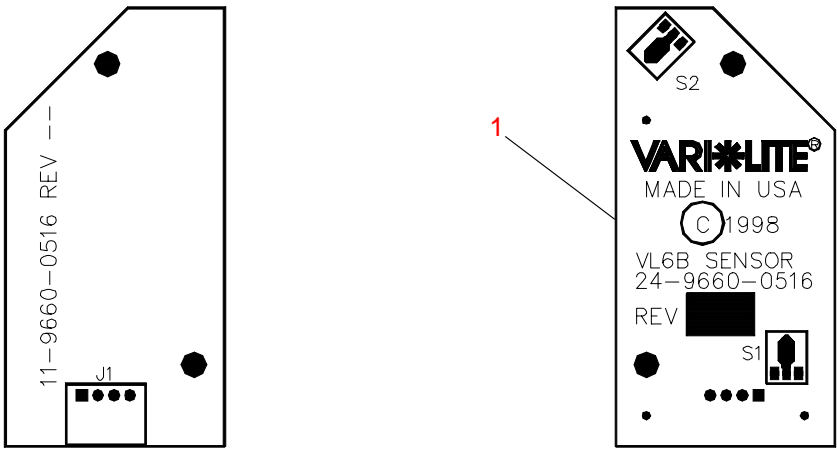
VL6B/VL6C Sensor PCB Assembly
